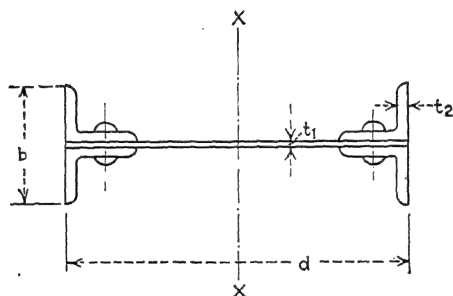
23.—Cross section of built-up fuselage reinforcing ring.
